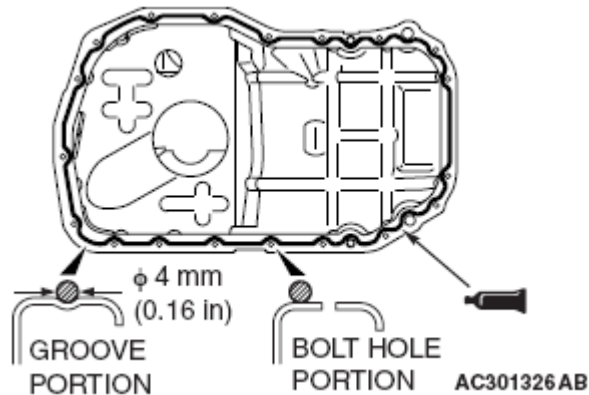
Applying Sealant To Mating Surface Of Oil Pan
